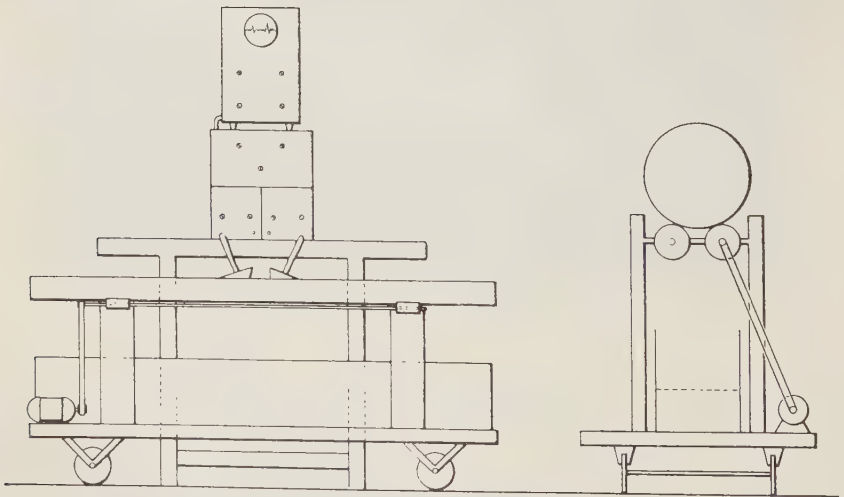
Assembly for routine inspection of extruded cylindrical bar and of cast billets.
